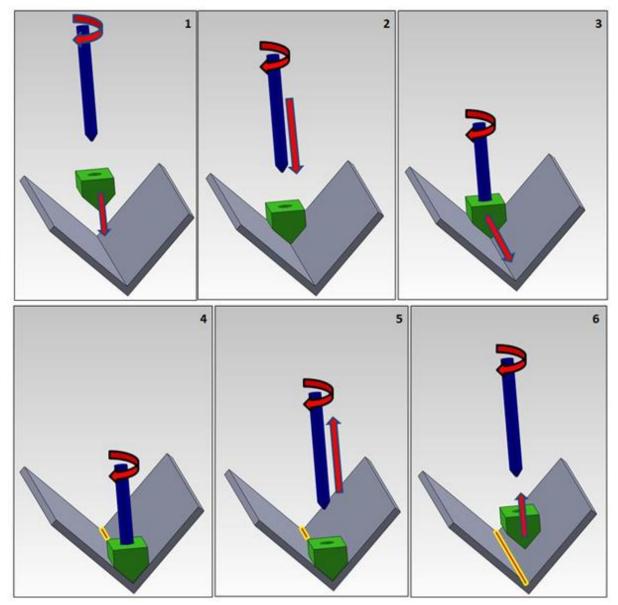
The picture sequence shows the welding procedure for FSW with stationary Shoulder. 1) The Shoulder is lowered down to the weld piece, keeping constant pressure on it. 2) The Probe is lowered down thru the Shoulder while rotating. 3) When the weld piece reaches forging temperature the Probe and Shoulder starts to move along the joint line. 4), 5) When the weld is finished the Probe is raised up while still rotating. 6) The Shoulder is moved up and the welding operation is finished.
